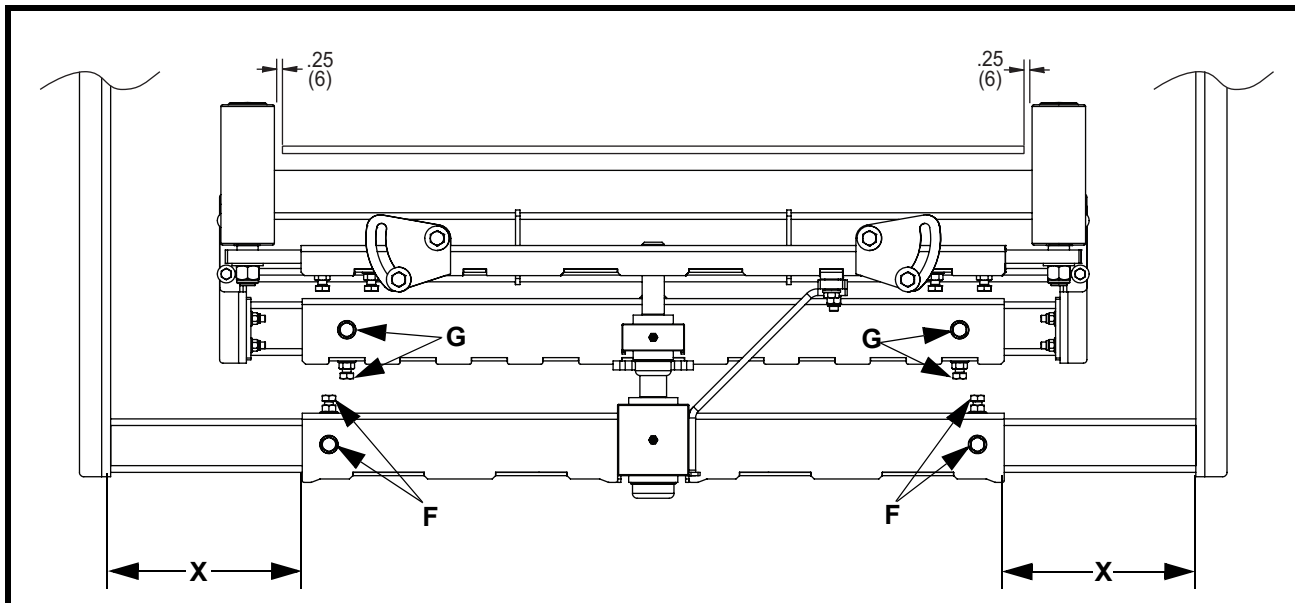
Mounting Dimensions—Martin® Tracker™ HD (Lower Unit)
